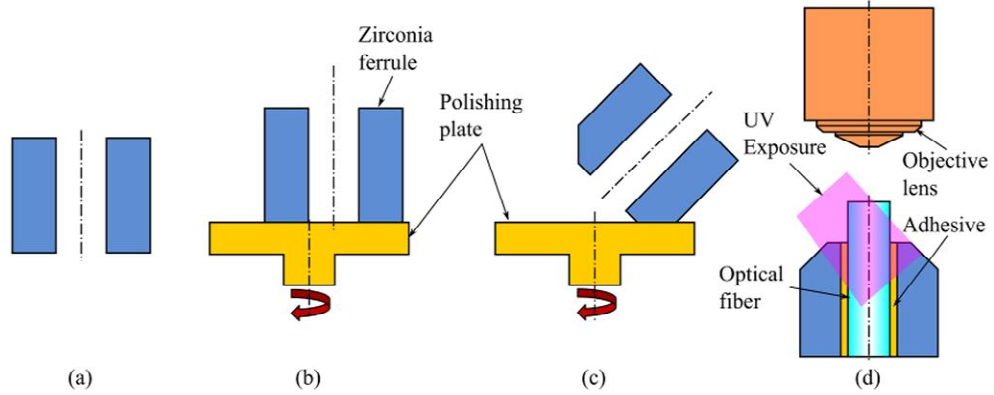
Fabrication process of the mold for creating FP cavity.
